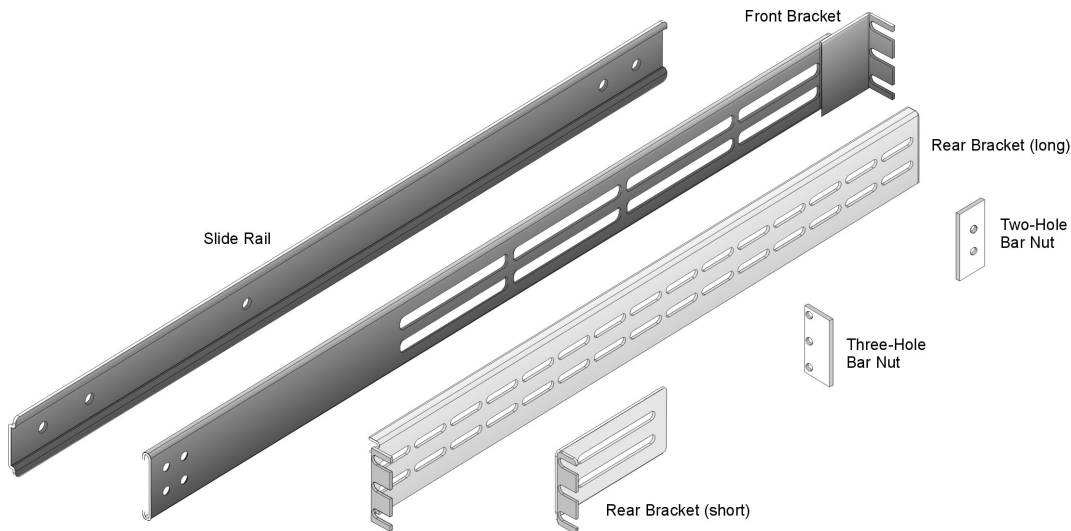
Mounting Brackets, Slide Rails, and Bar Nuts
